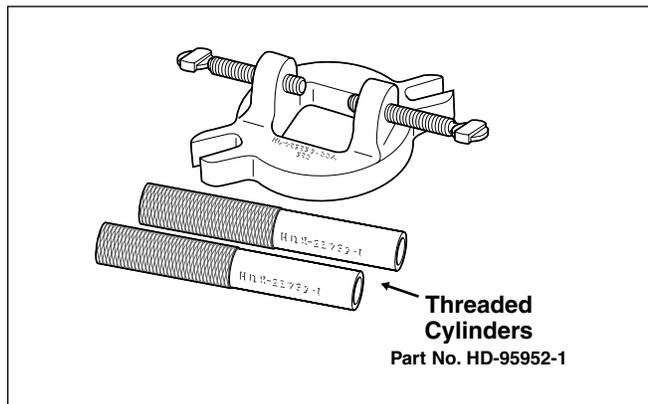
Connecting Rod Clamping Tool (Part No. HD-95952-33B)
